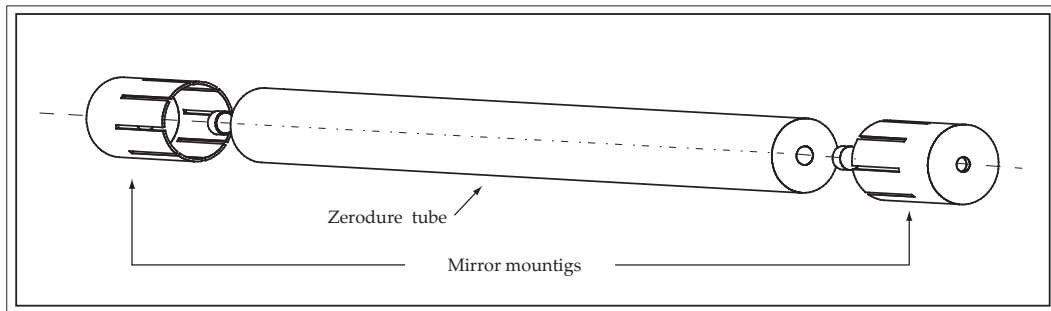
Explosion drawing of the confocal Fabry-Perot interferometer.
